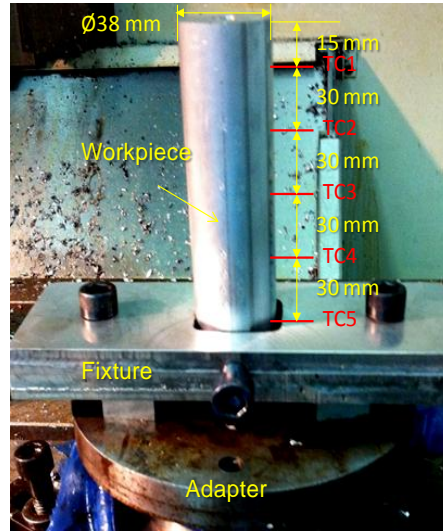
Setup I: Cylindrical workpiece with five thermocouples embedded along the depth for the inverse heat transfer method
